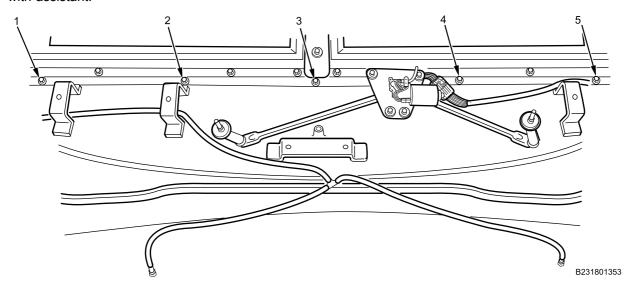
Cross-Vehicle Equipment Bracket Bolt Exterior Locations.
